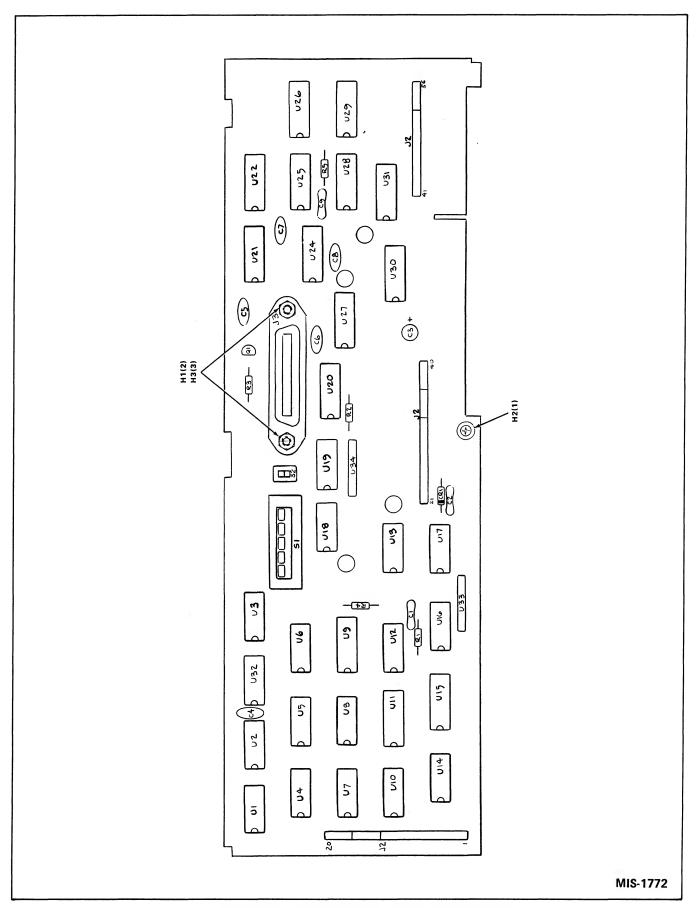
IEEE-488-1975 Interface PCB Assembly
